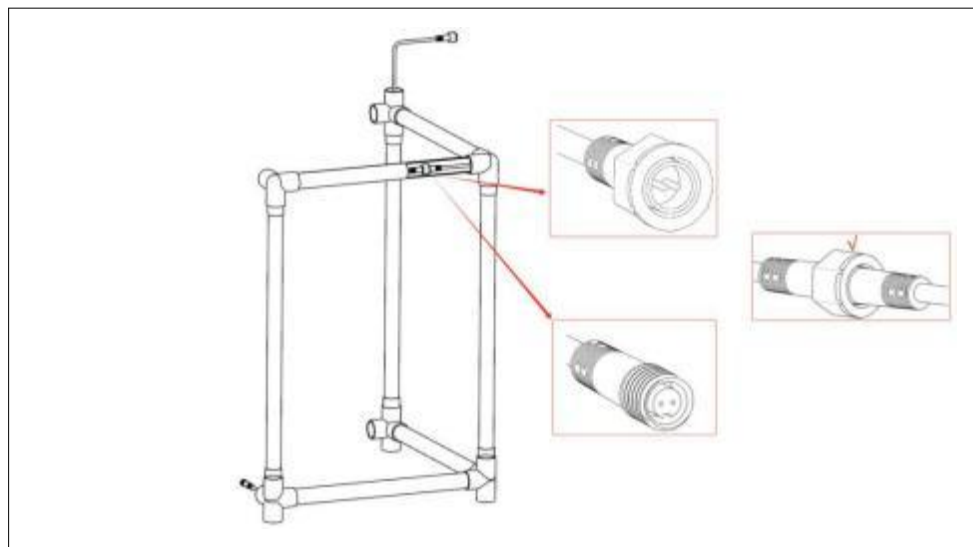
Connect the assembly in Figure 3 and the assembly in Figure 4 together according to the diagram. (Note: Wire first! Tighten with the nuts that came with the wiring.)
